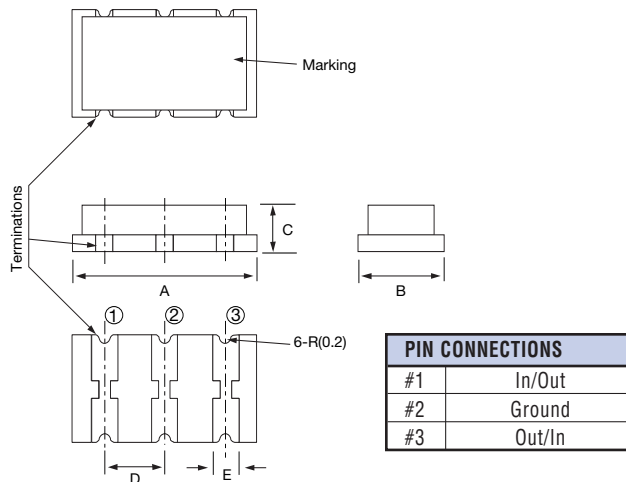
ECS-SR-B Series - Top, Side, Bottom & End views
